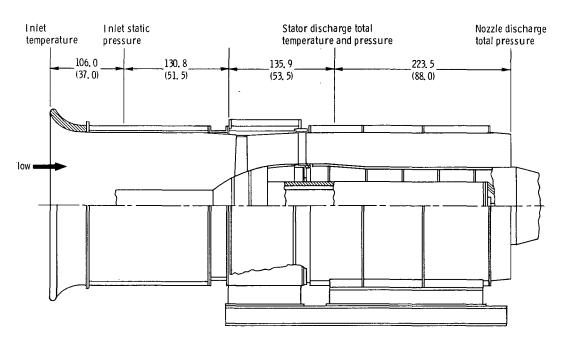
Cross section of QF-6 fan stage (hard walls). (All dimensions are in cm (in.), )
